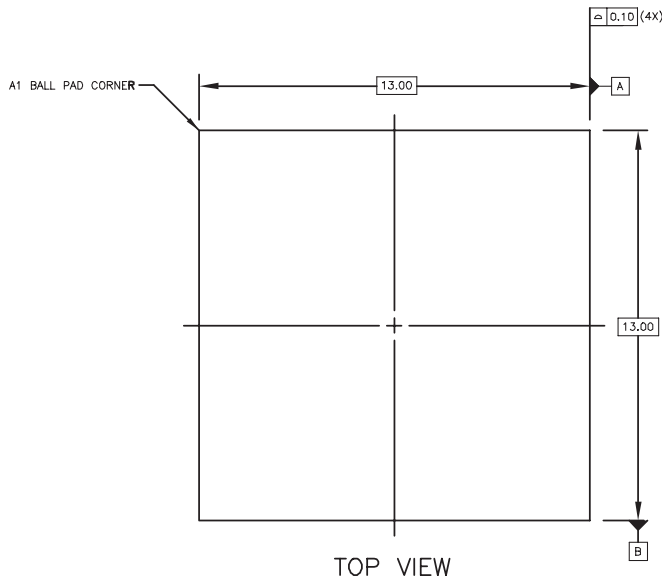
Package 132 ball Ceramic BGA (EB and EF package).
